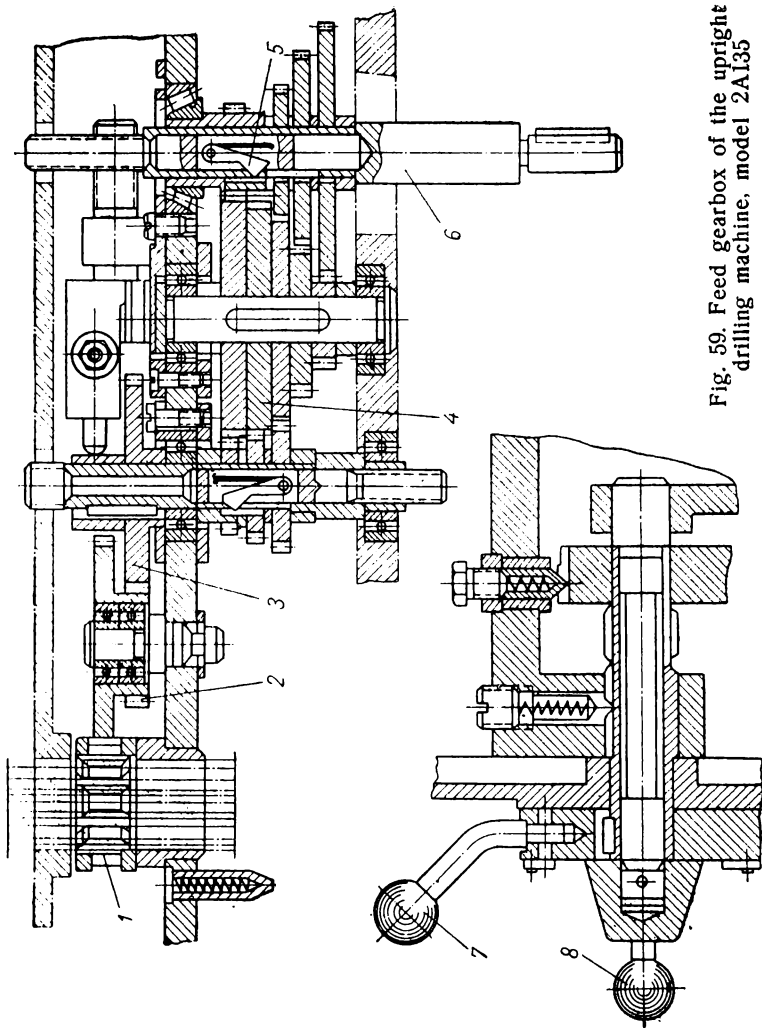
Feed gearbox of the upright drilling machine, model 2A135
